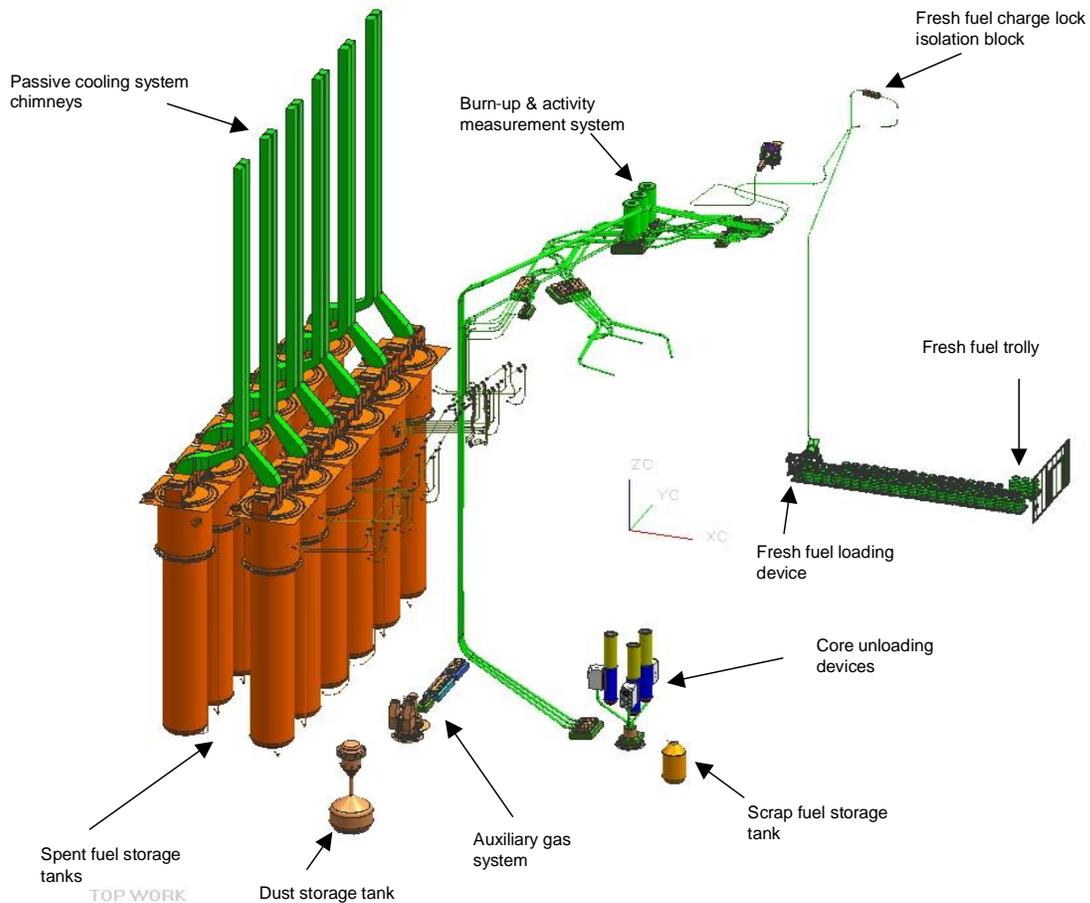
Isometric Layout of the Fuel Handling and Storage System inside the Reactor Building
